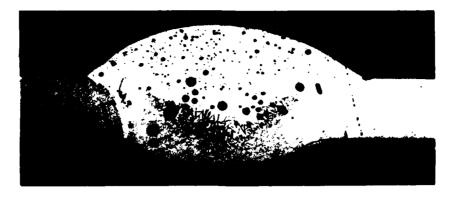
Weld made with preweld heat treatment at $750~\mathrm{F}$ for 100 hours in vacuum, AC, ER4043
